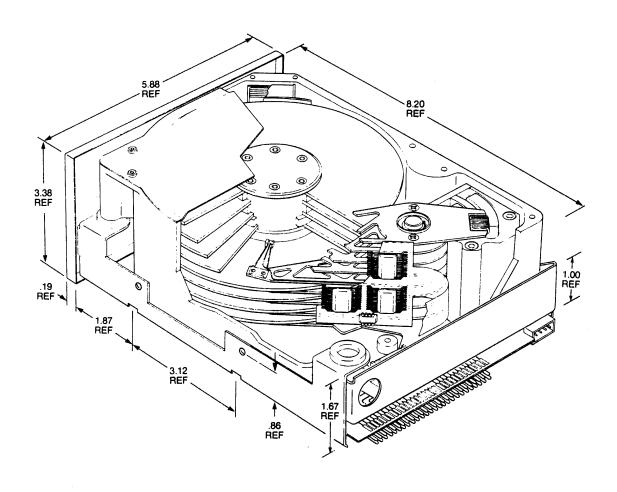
XT-3000 Mechanical Outline and Mounting Hole Location
